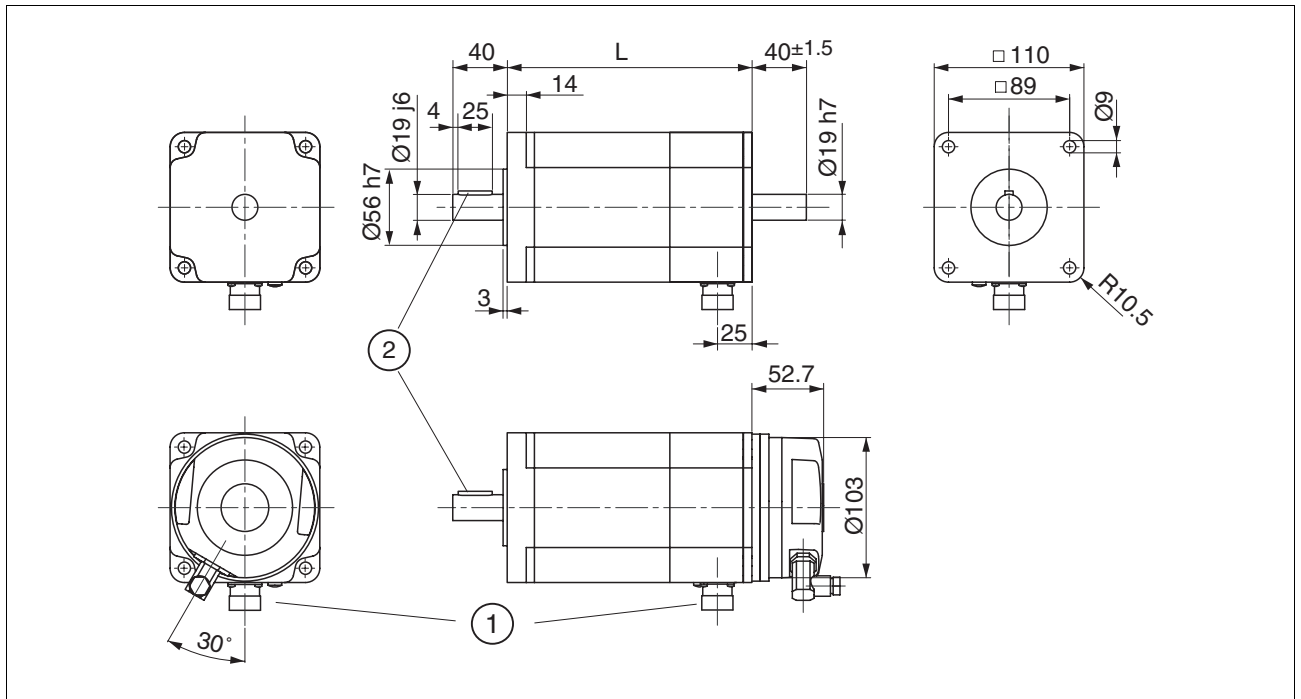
BRS3A dimensional drawing connector version without encoder
